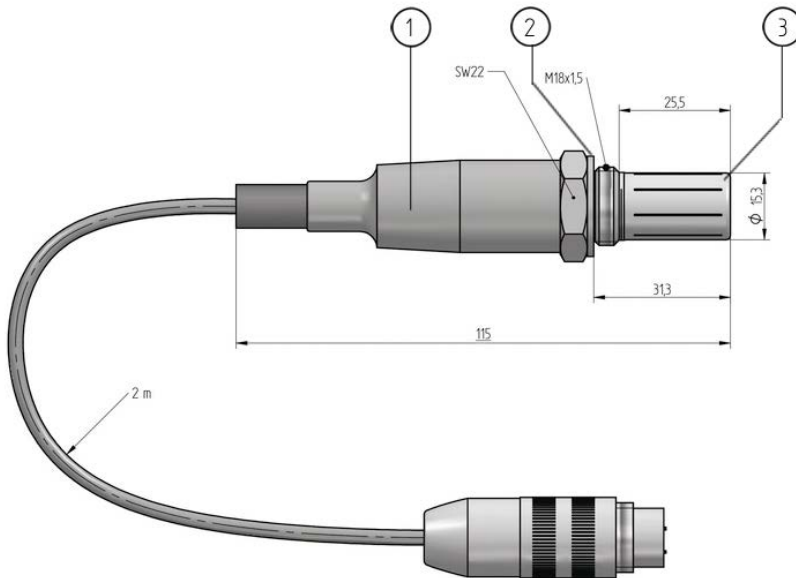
Dimensional drawing KS1D Combination Probe without housing
